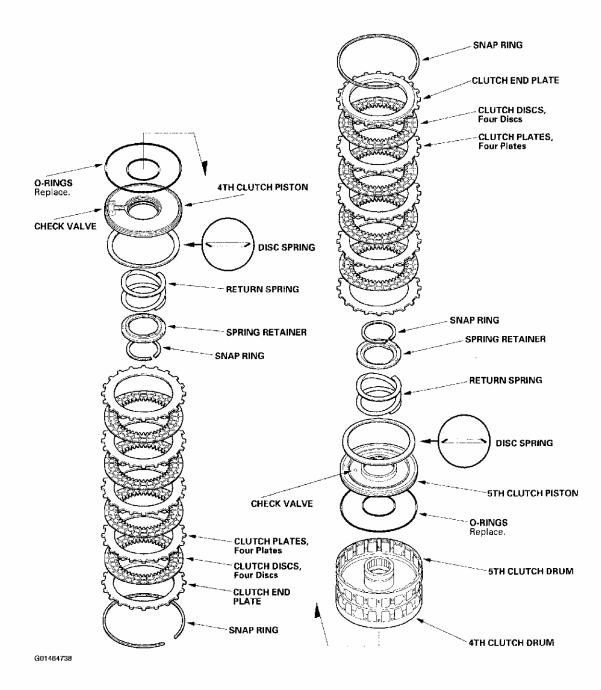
Exploded View Of 4th/5th Clutch Courtesy of AMERICAN HONDA MOTOR CO., INC.
